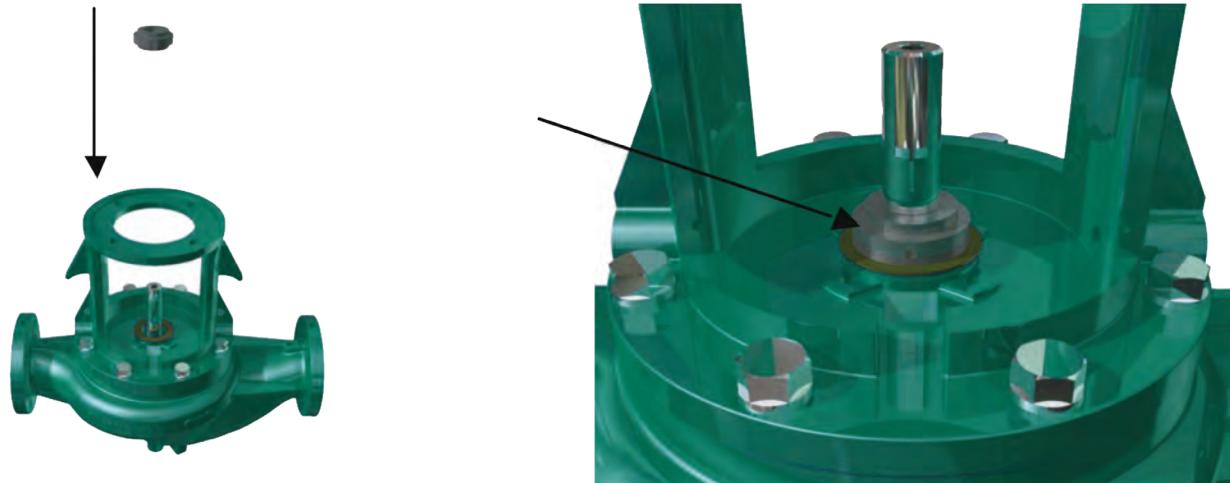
Placing the stationary part of the mechanical seal over the gasket.
